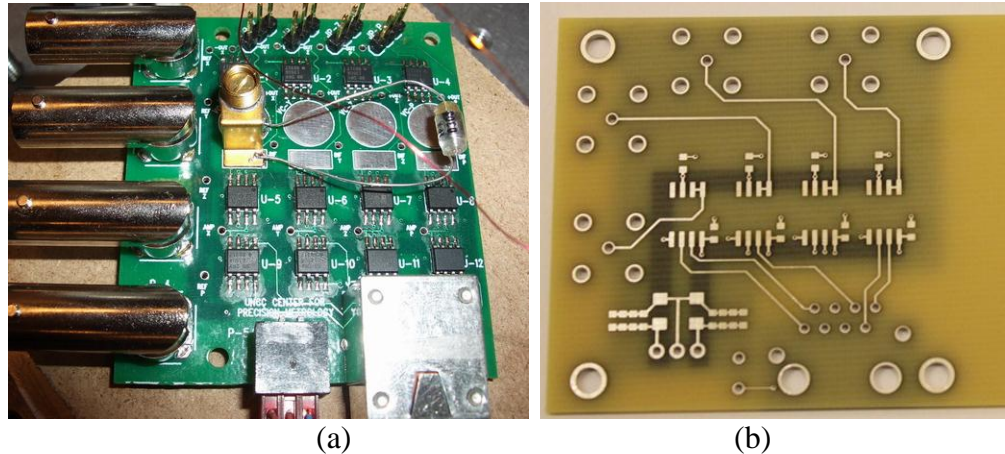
Photography of the pre-amp, (a) driver, (b) receiver PCB board without components.
